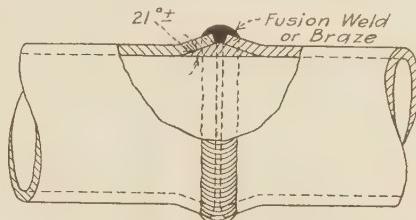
TAPER-WELD LINE CONNECTION
